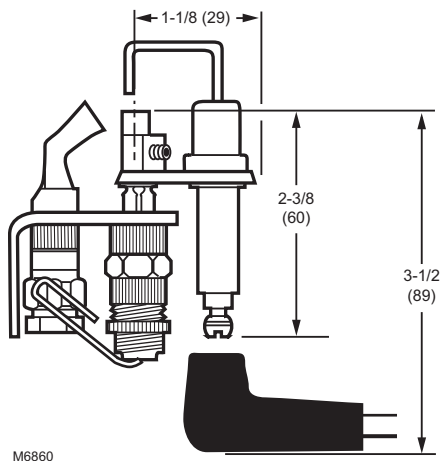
392431 Igniter-sensor mounting dimensions in inches. (mm).
